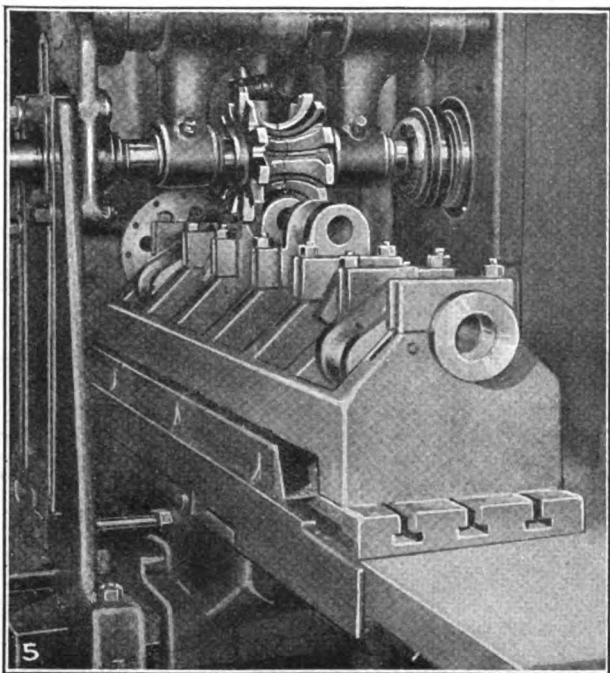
MILLING ENDS OF CRANKS. FIG. 6. MILLING THE CORNERS OF CHEEKS
